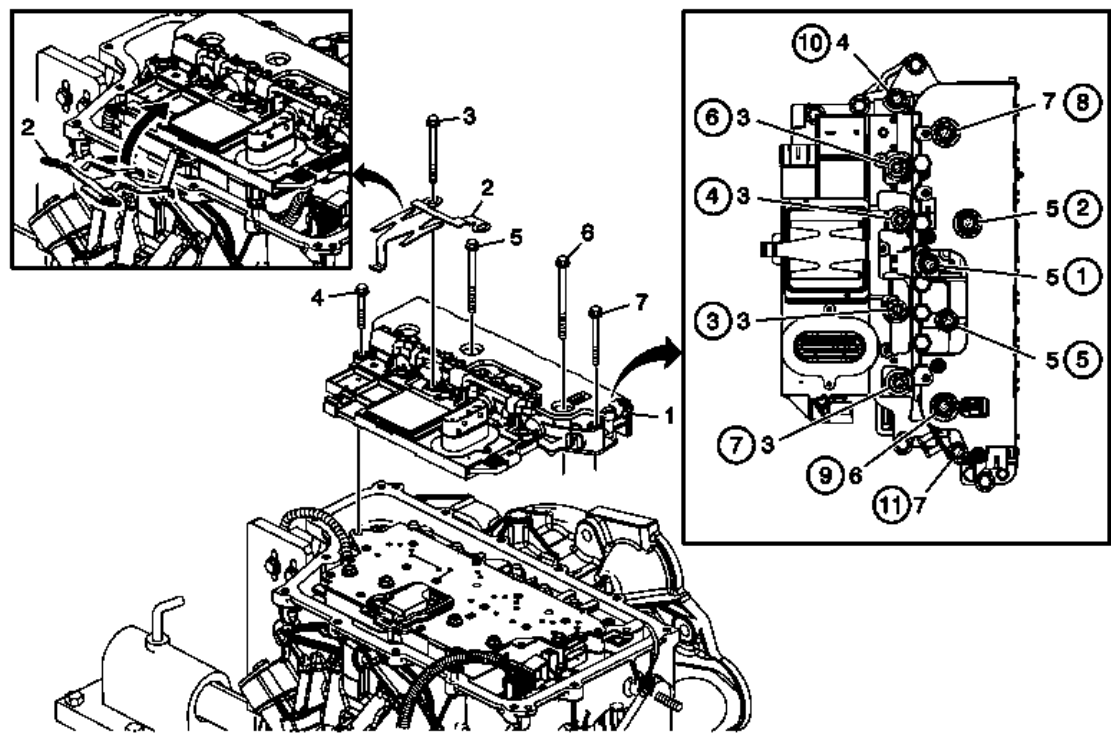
Control Solenoid (w/Body and TCM) Valve Assembly Components
